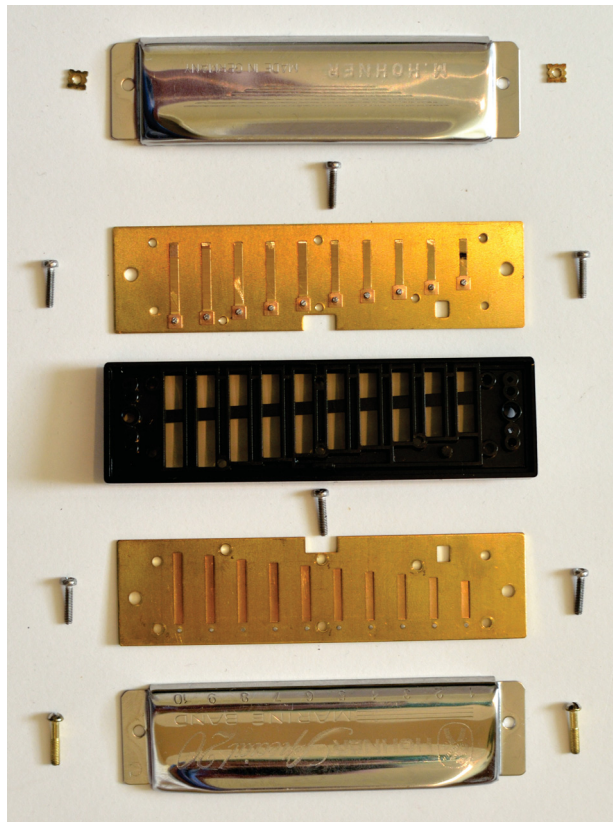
A disassembled Hohner “Special 20 Marine Band” showing the top and bottom caps, the reed plates, and the plastic comb.
